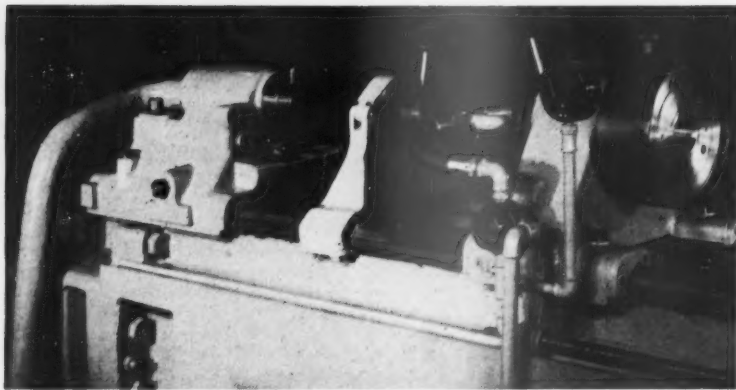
Rear view of model B3 V.D.F. deep-hole boring machine, showing the adjustable position pressure head
